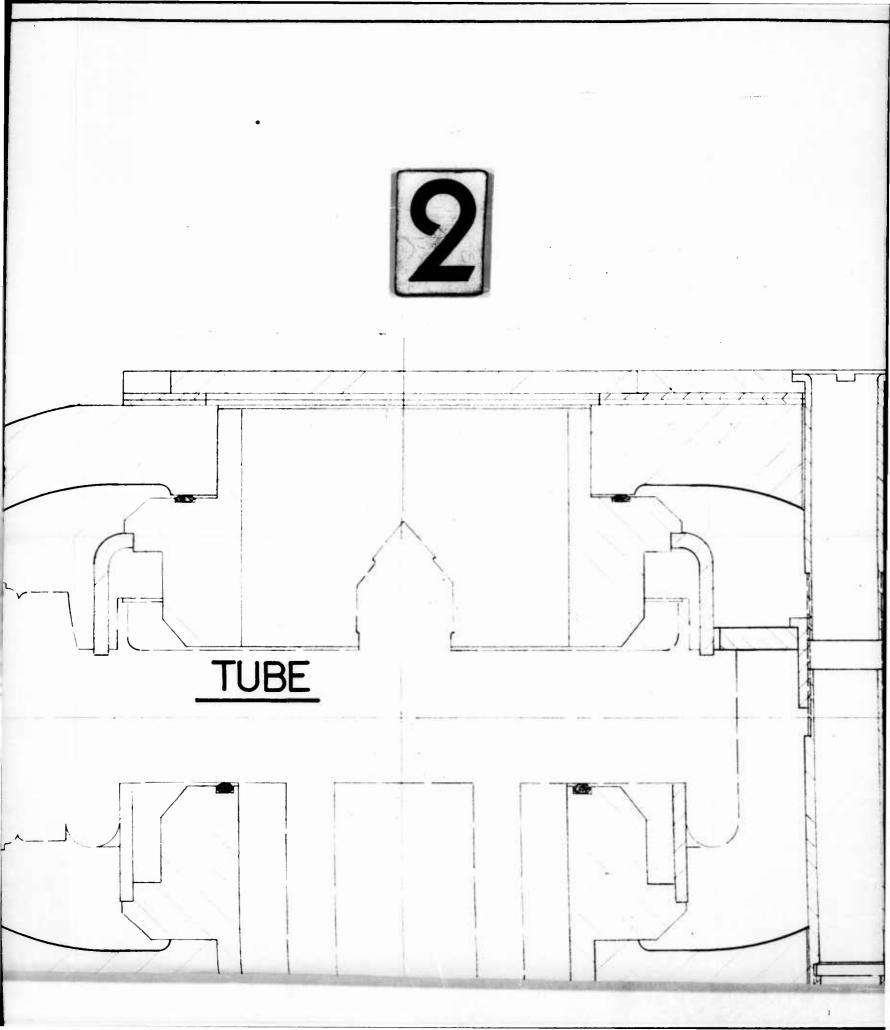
shows a cross sectional view of the new clamping method. This new design independently holds the tube to the lower magnet half; clamps the top magnet half, magnet cover and shunts to the assembly; and last, permits the mounting base to be bolted on to the assembled tube. This last operation will be done before shelf testing the tube. At the end of the shelf test holding period, the tube will be given a post-final electrical test before shipment. This new packaging method is more flexible and allows close control at each step of the packaging operation.
